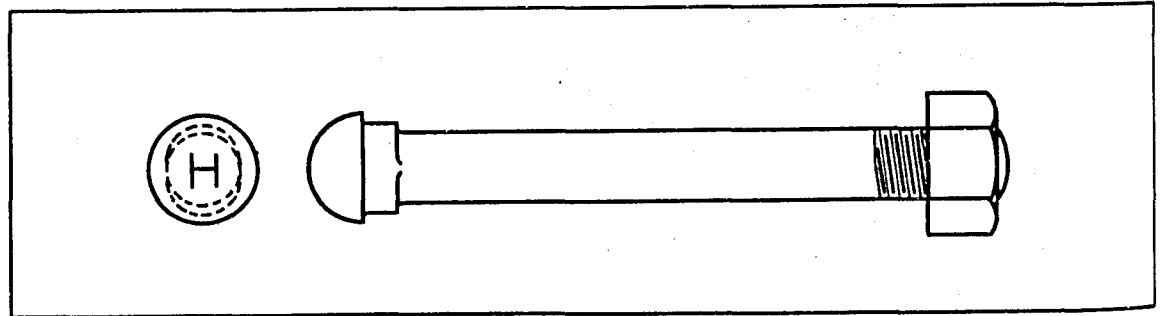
TYPICAL HEEL BOLT. (MARK 'H' SHOWN.)
